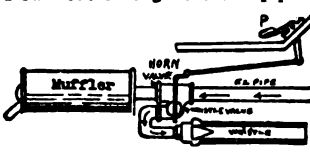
Fitting a muffler "cut-out." Mufflers sometimes are not large enough or are clogged up and offer "back pressure" or resistance to the full passage of the exhaust. A "cut-out" is helpful in climbing hills and to help keep engine cool. The muffler cut-out is also a convenient method of ascertaining (by listening), whether all cylinders are firing regularly.
